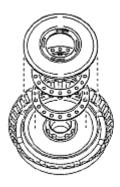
Identifying C1 Clutch Piston Of C1 Clutch Drum Courtesy of MAZDA MOTORS CORP.
